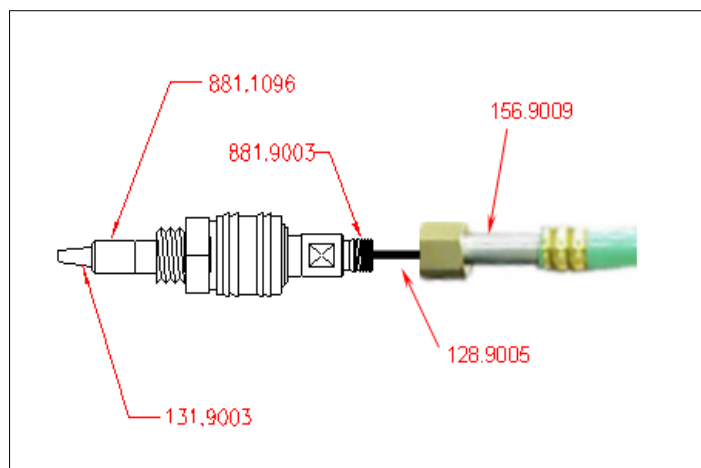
Infeed Weld UtilitiesProcedure 4-7 Installing the wire delivery conduit and securing for smooth wire transfer1. Conduit Assembly
